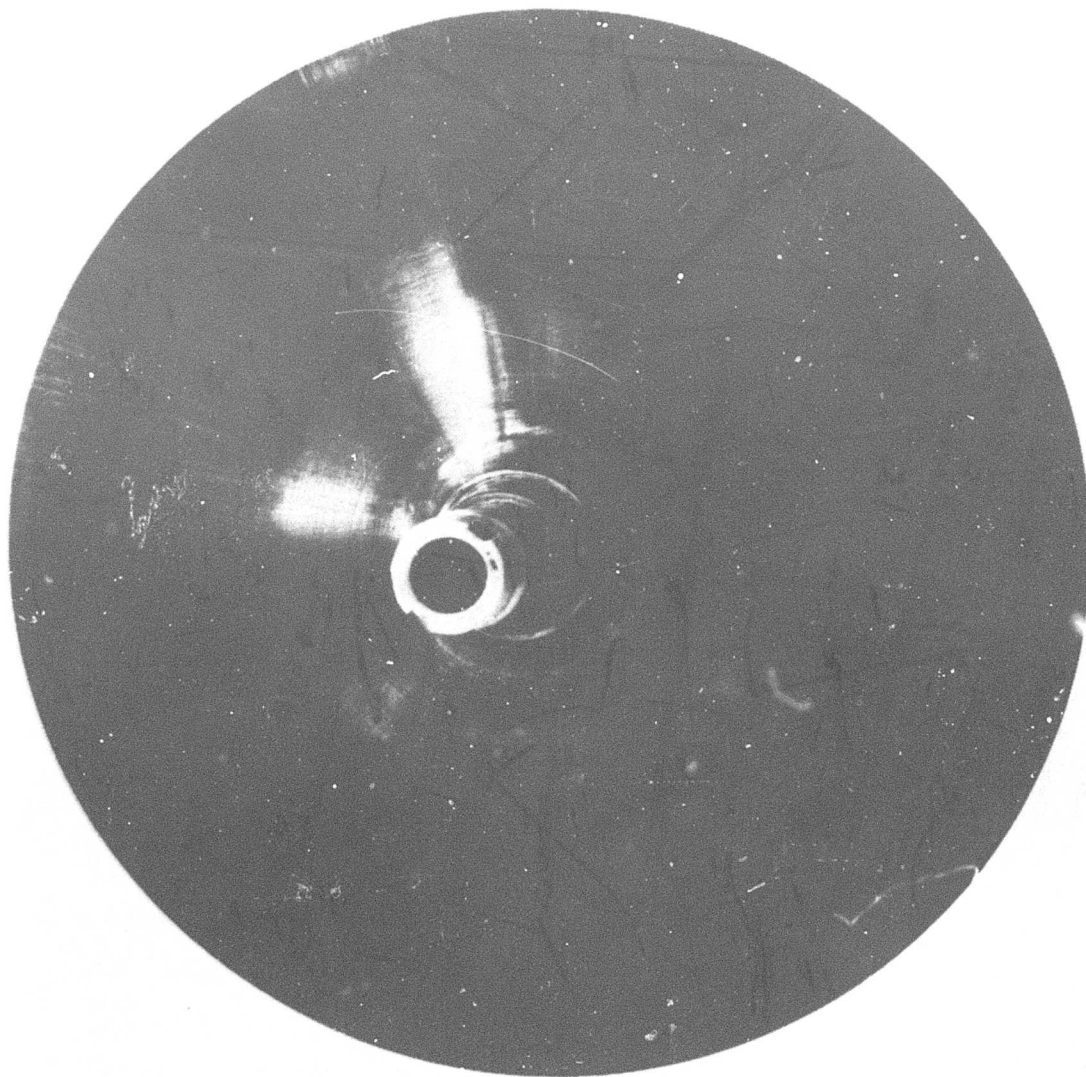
Flywheel After Continuous Duty Cycle Endurance Test
